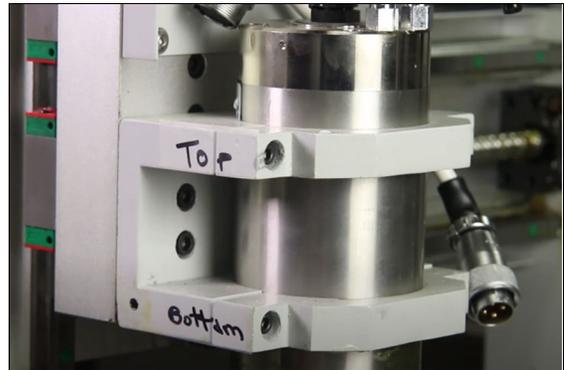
Spindle clamps marked to indicate the top and bottom.
